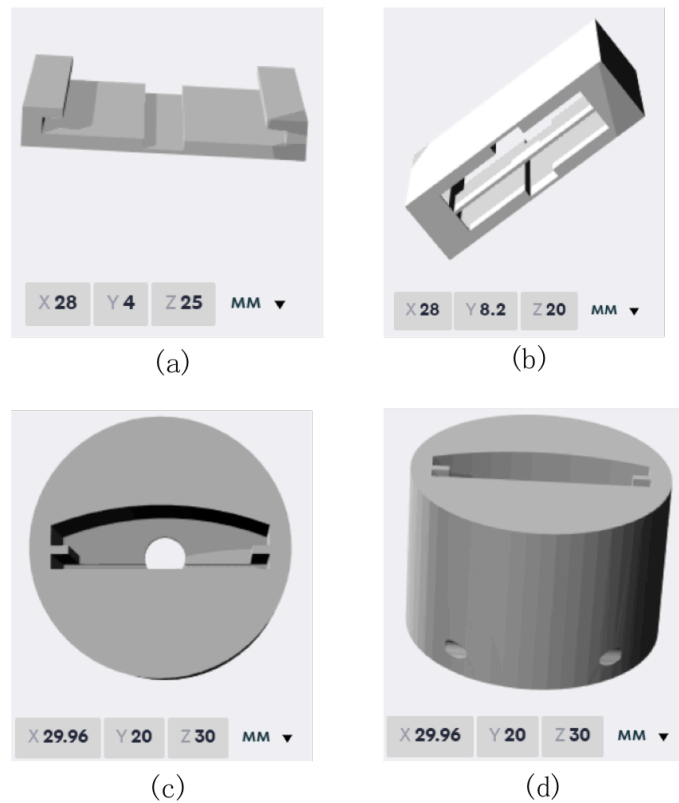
3D printed accessories by Solidworks. (a) 3D part for PCB fixation during system integration; (b) 3D part for fixation of the optrodes during EIS measurement; (c) & (d) Head-stage to be placed on the animal head.
